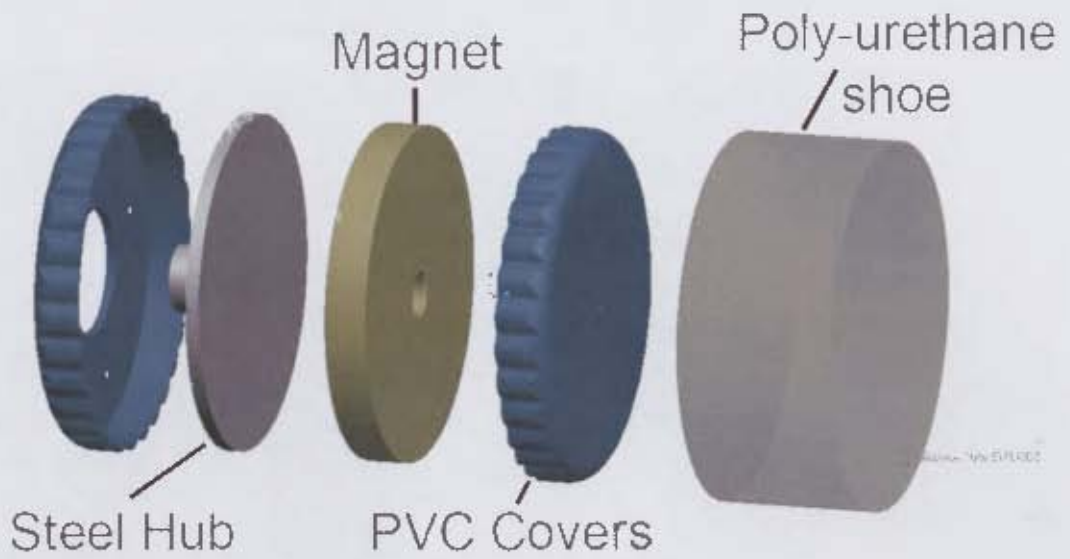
RE-DESIGNED WHEEL ASSEMBLY
